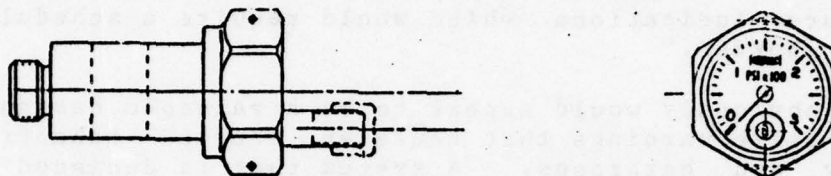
WHEEL MOUNTED FILL VALVE/TIRE PRESSURE GAGE - CONCEPT B
